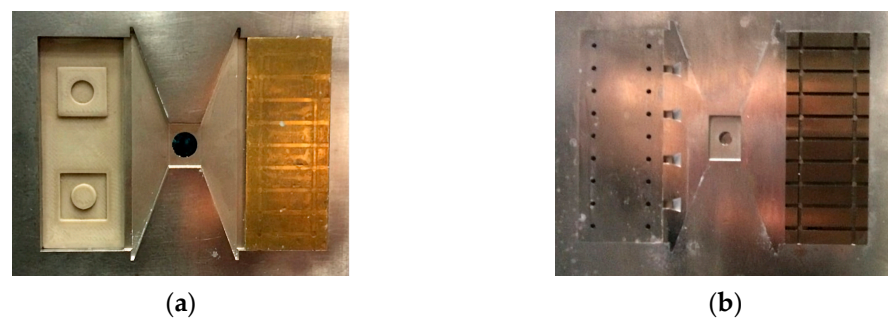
Molding tool with PEEK mold insert type 2: (a) nozzle side; (b) ejector side.
